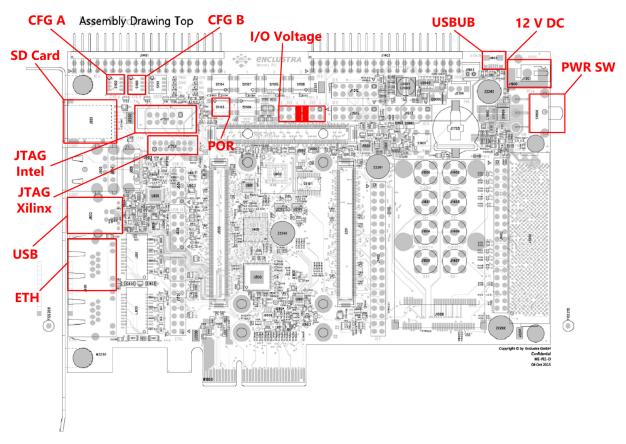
Mercury+ PE1 Base Board Assembly Drawing (Top View)
